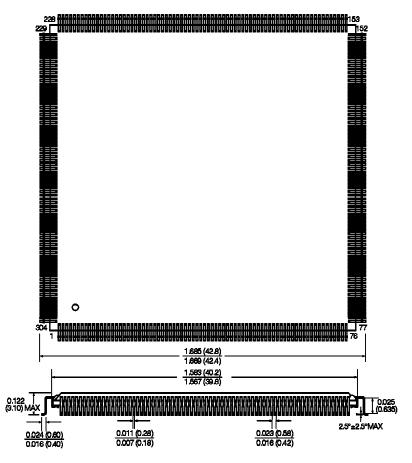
Top View, heat sink not shown. Drawing not to scale in(mm)
